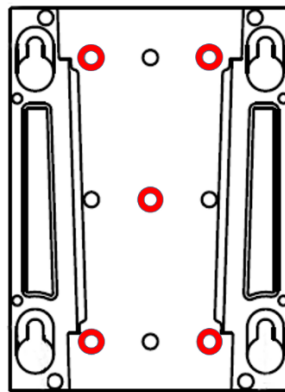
Mounting Bracket with Mounting Screw Holes Highlighted in Red
